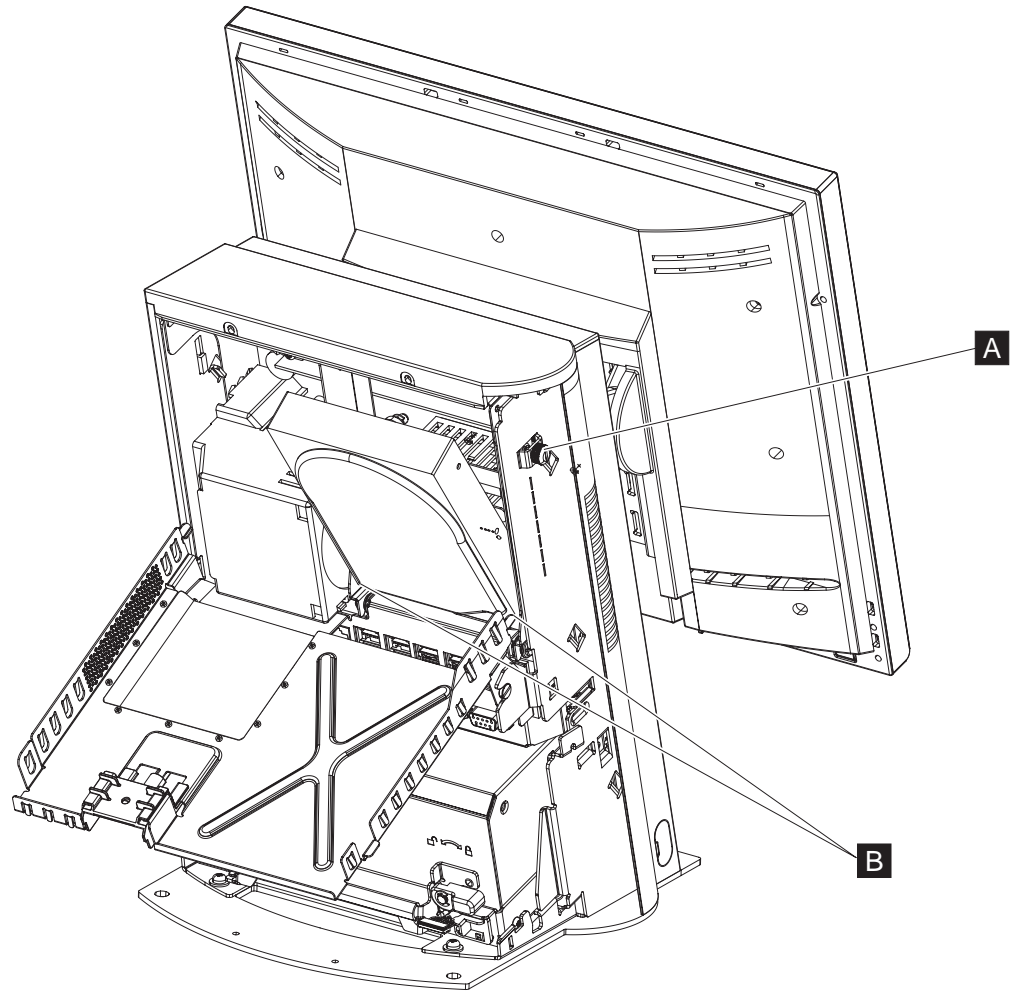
Removing the hard disk drive and bracket. For clarity, this figure shows additional components removed. However, you do not need to remove these to remove the HDD.
